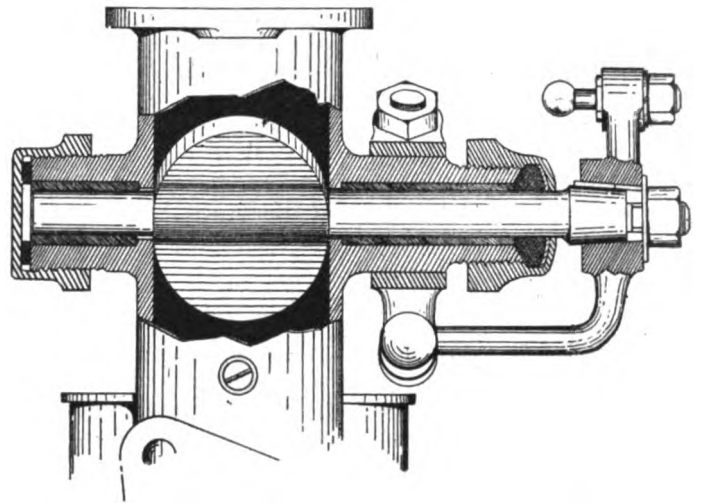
SECTIONAL VIEW THROUGH THE CARBURETOR THROTTLE OF THE TYPES-J AND L ENGINE
